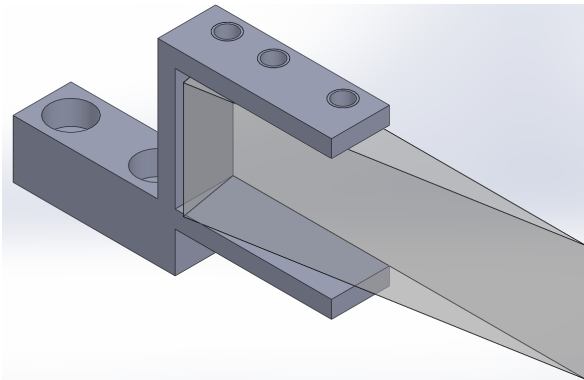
CNC part design to hold the movable glass wedge.
